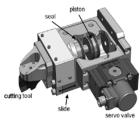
Actuator device (HSK tool holder not shown).^[4]
